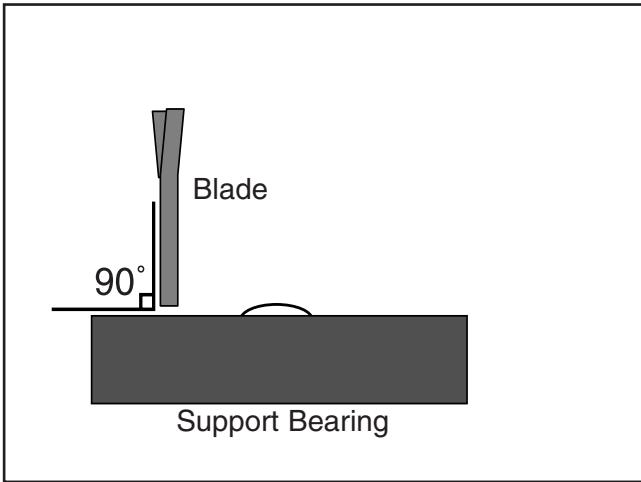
Illustration of blade set perpendicular (90°) to the support bearing face.
